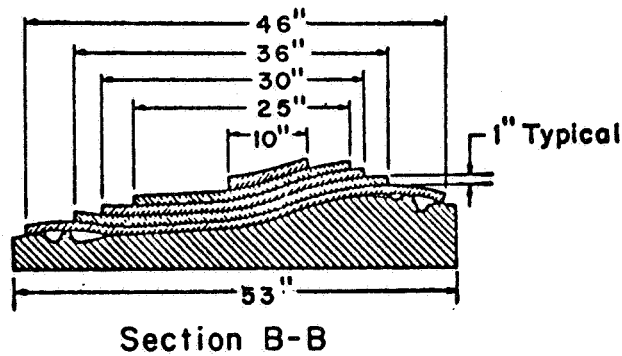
POSITIONING OF RUBBER BLANKETS (REF. 55)
